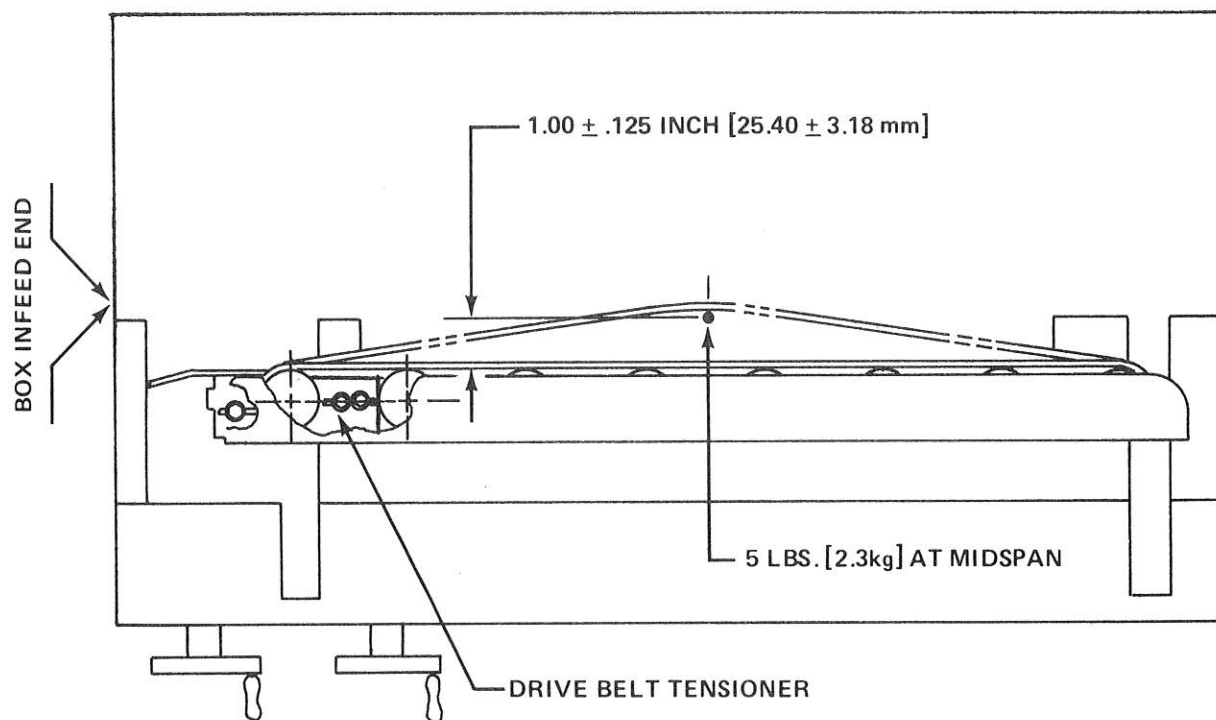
BOX DRIVE BELT TENSION - (TOP VIEW)
